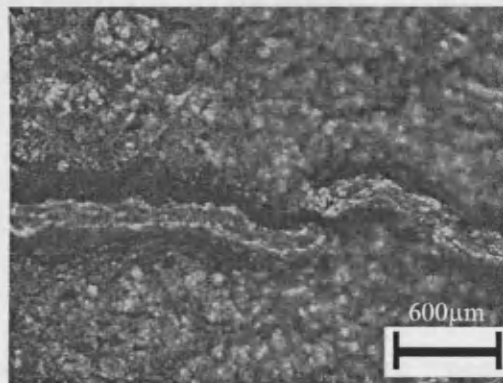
Flashes on 316 S16 casting due to mould cracking during firing.
